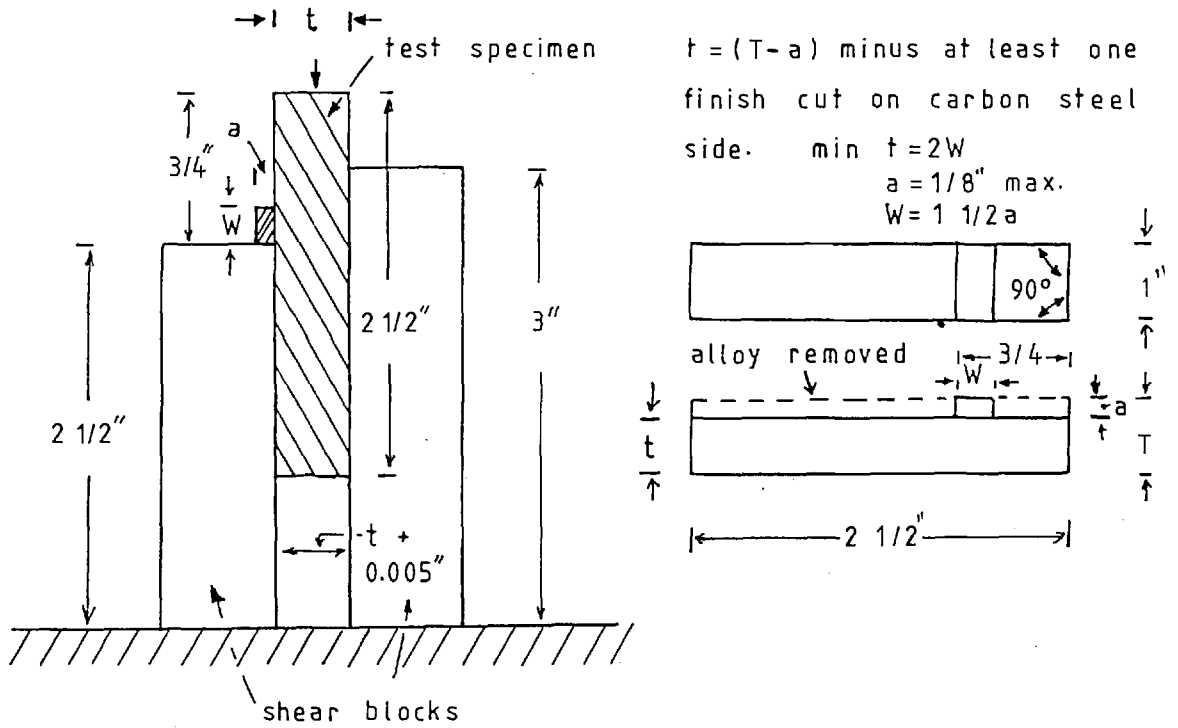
TEST SPECIMEN AND METHOD OF MAKING SHEAR TEST OF CLAD PLATE (FROM ASTM A 264-74 a).
